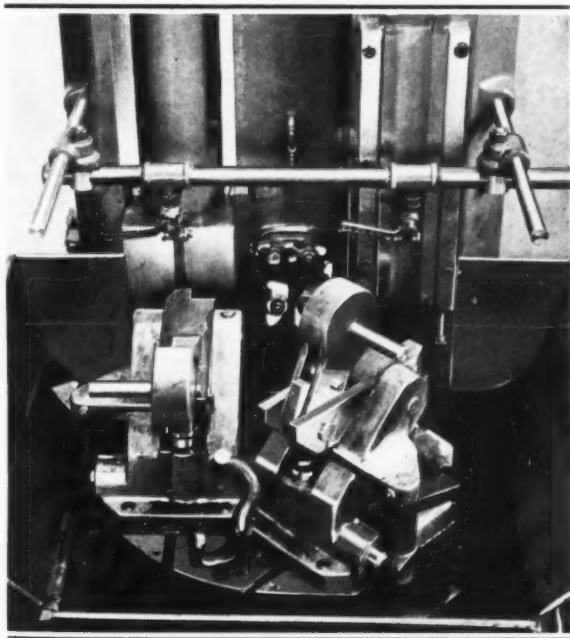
Cincinnati Duplex Hydromatic Broaching Machine Finishing Bosses on a Forged Automobile Part
